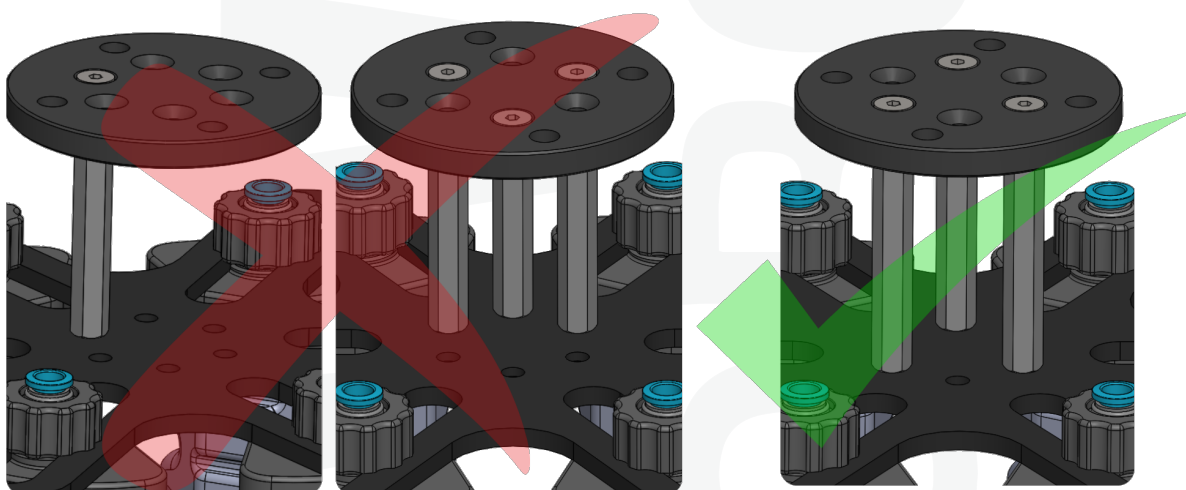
TGrip-2 Universal Mounting Adapter Assembly Orientation (3x Standoffs must be evenly spaced at 120 degree intervals)
